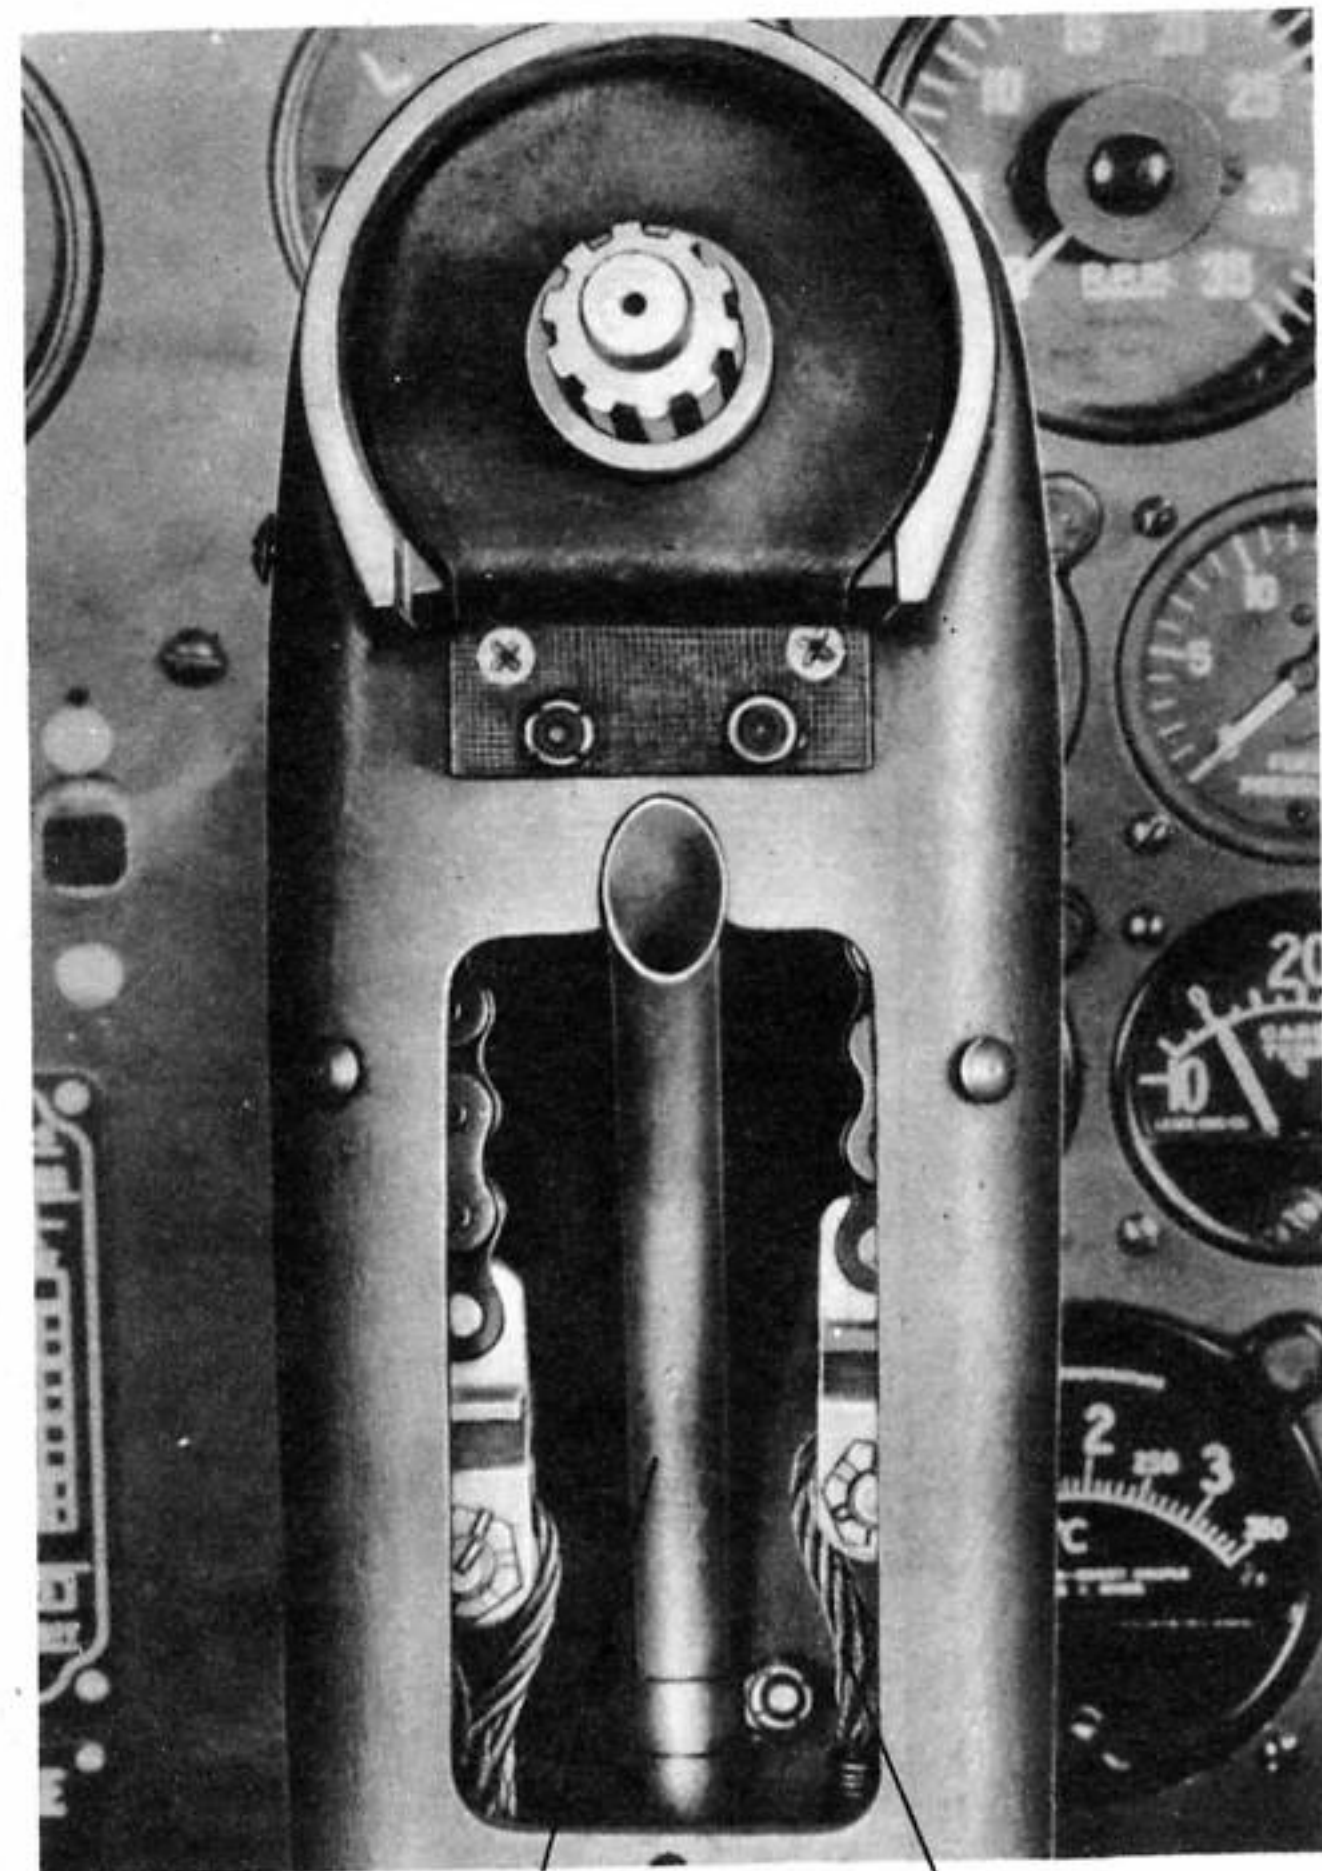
CONTROL COLUMN - TOP COVER PLATE AND WHEEL REMOVED
